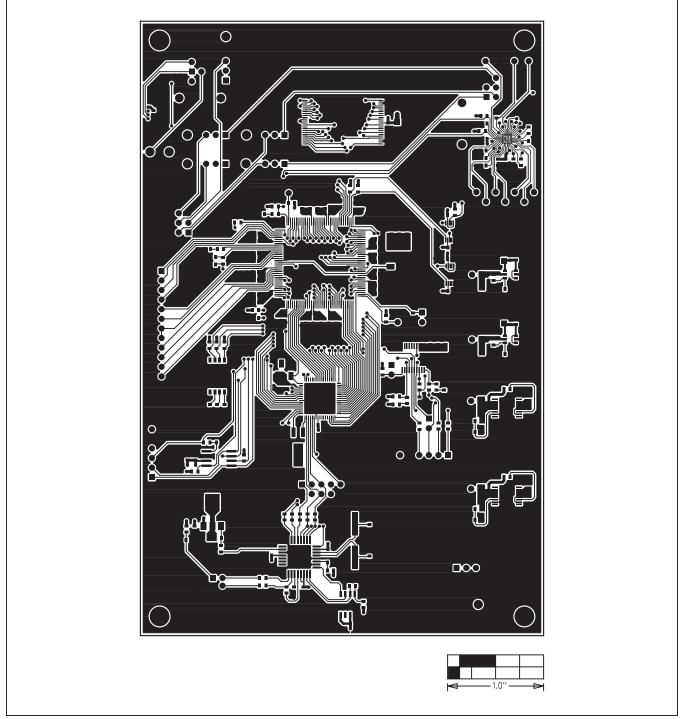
MAX44005 EV Kit PCB Layout—Bottom Side
